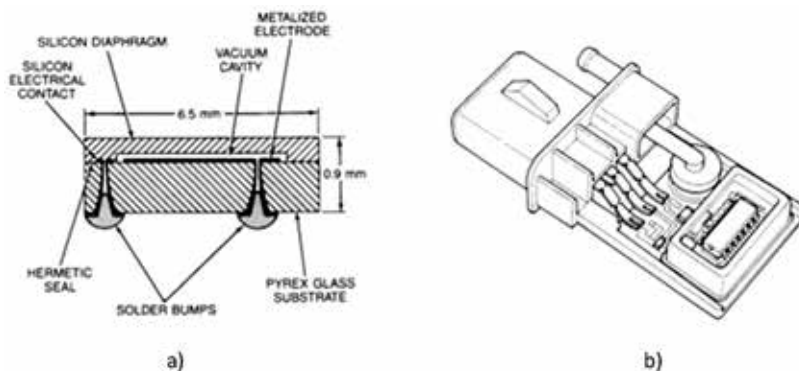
(a) Cross-section of the Ford SCAP device showing thru-wafer vias; (b) Drawing of the final assembly with the SCAP WLP mounted directly to the substrate.
